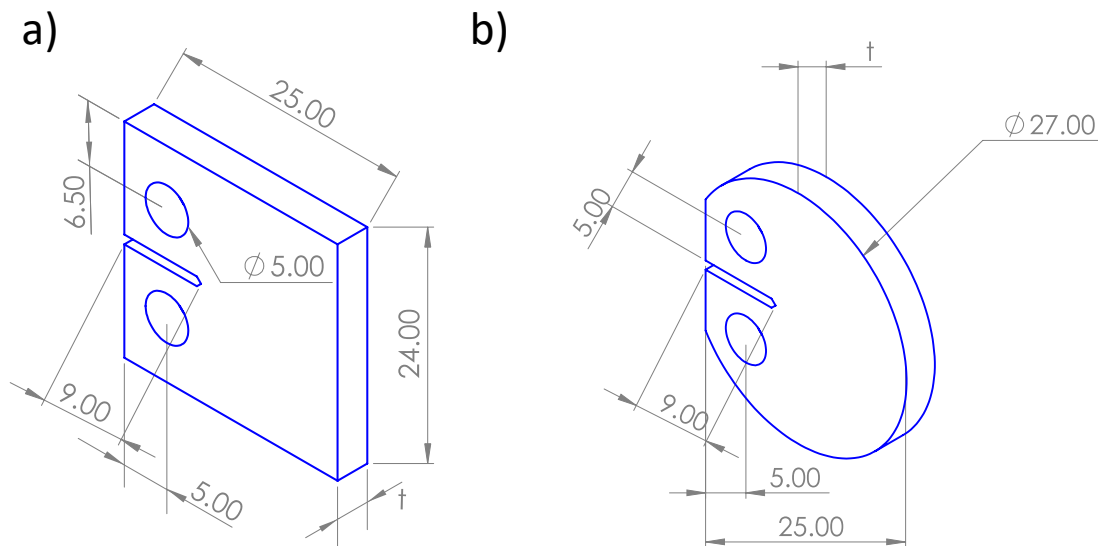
Technical drawing of fracture toughness samples.
